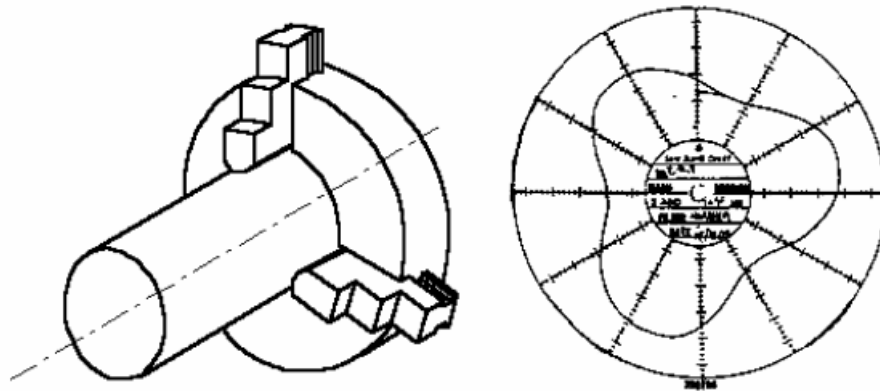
Cutting of cylindrical workpiece with 3 jaw chuck and out of roundness due to the chuck
